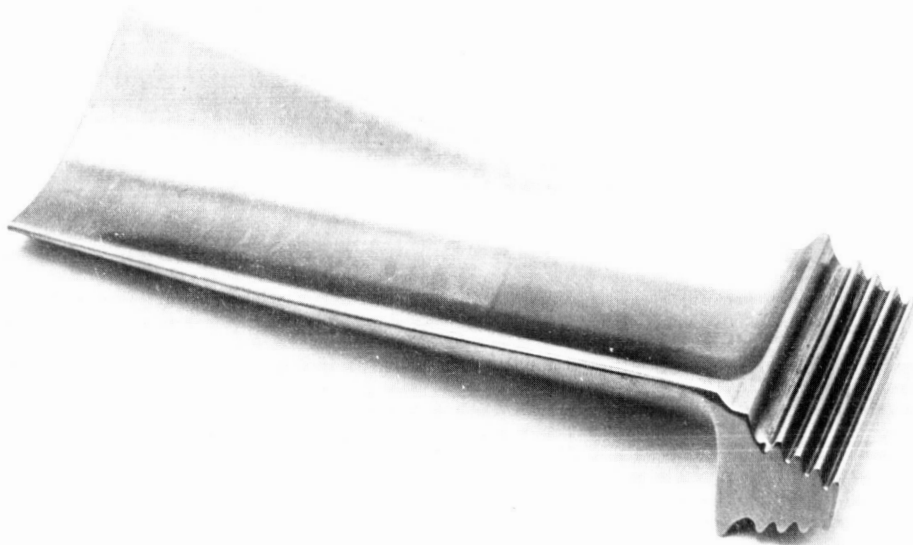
TURBINE BLADE FORGED AND MACHINED FROM INCONEL 700
